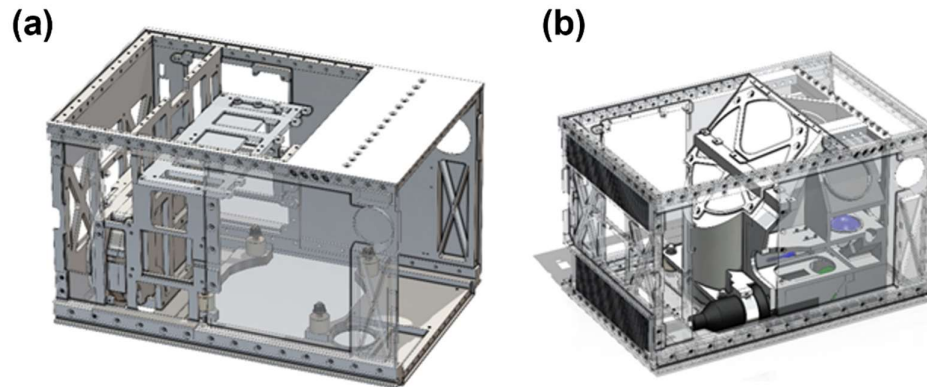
(a) Side view of the satellite body. (b) Side view emphasizing the optical assembly subsystem
